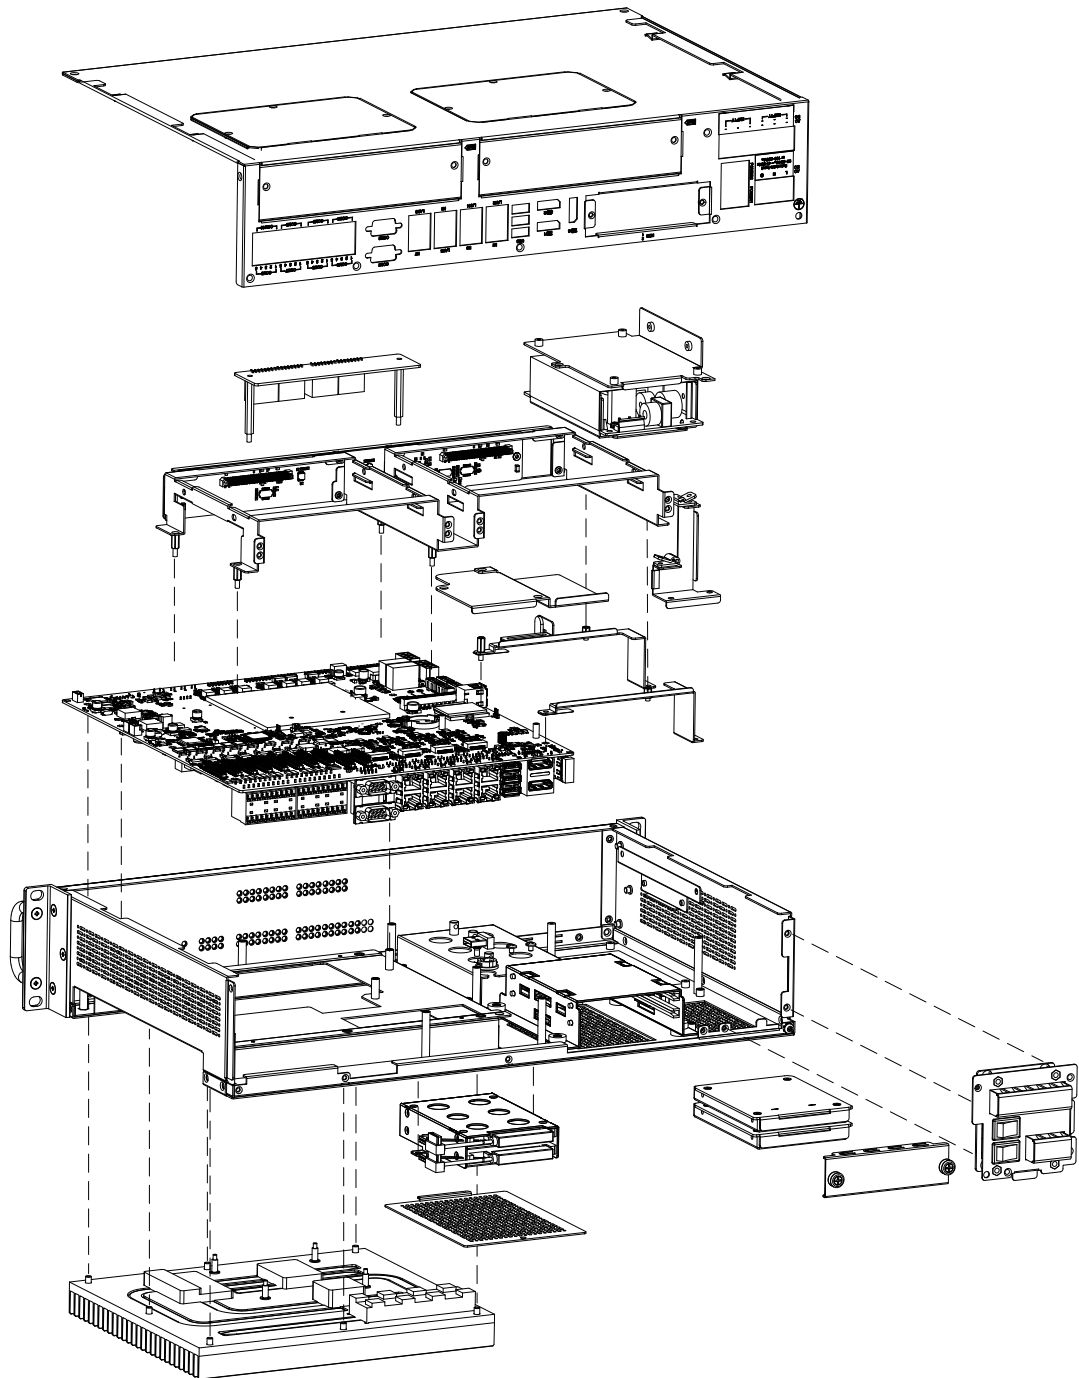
ECU-4784-V2 Series Exploded Diagram
